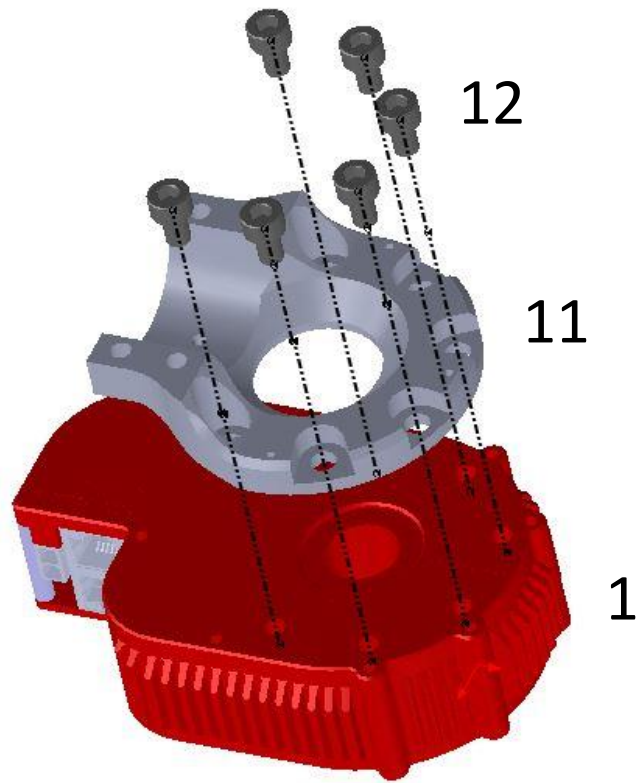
Attaching the Tube Mount to the Second Hebi Actuator
